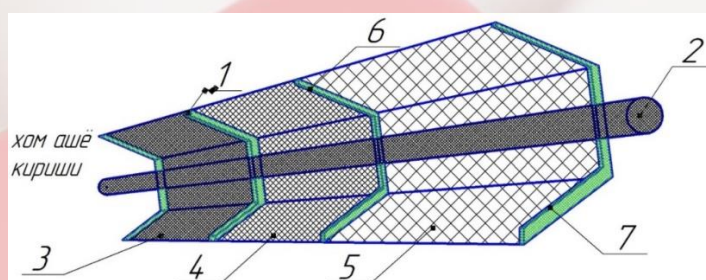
Sito-burat SM-237A: 1- horizontal shaft; 2 – bearings; 3 - raw material input; 4 - mats of different sizes; 5 -frames of sets.
